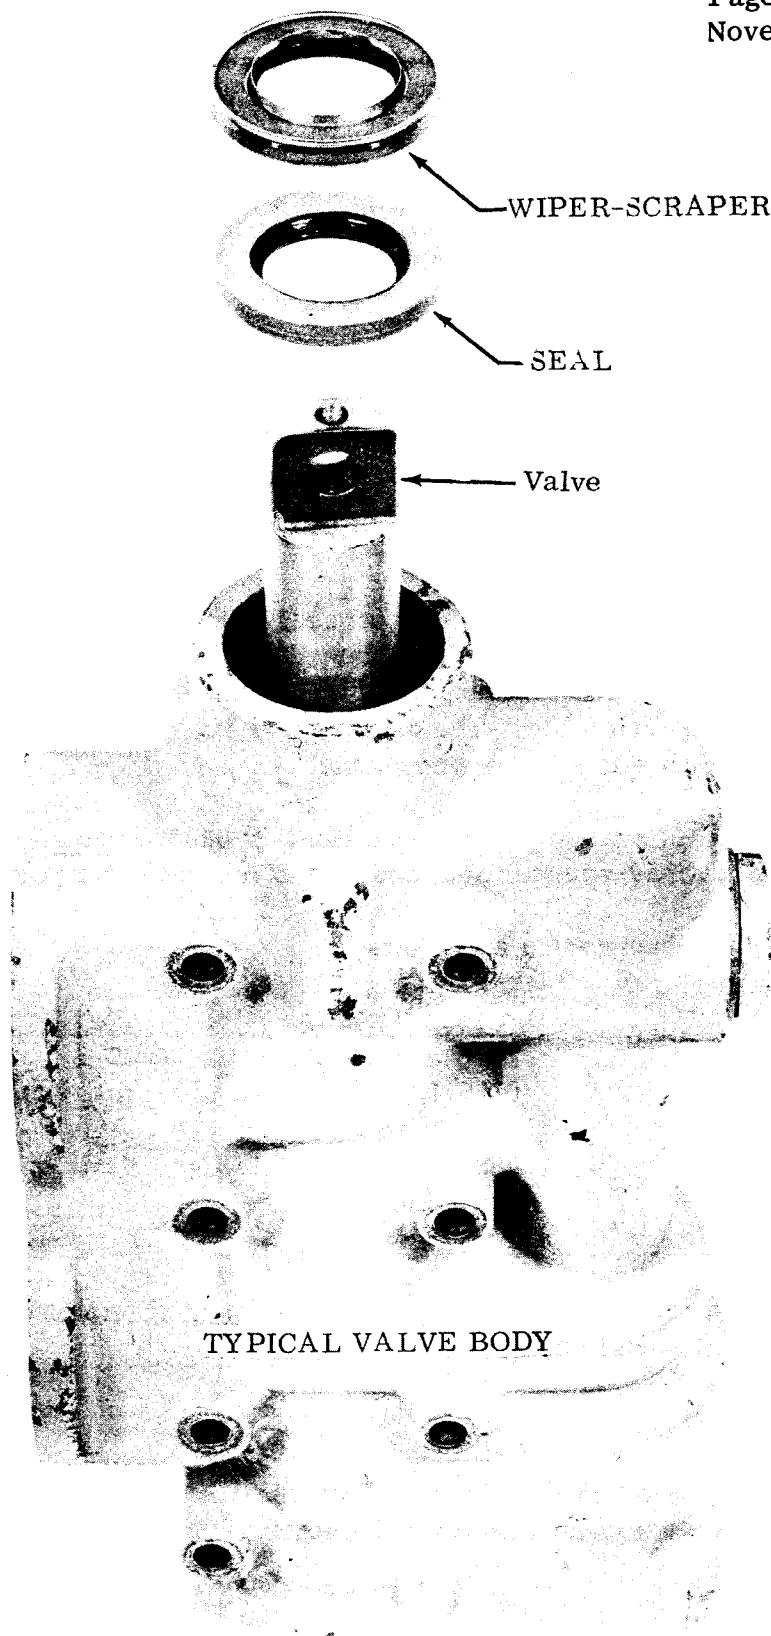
RETARDER VALVE BODY ASSEMBLY
